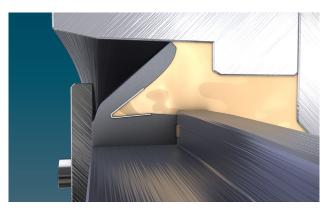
Sealing arrangement in a roller bearing for a direct drive turbine - sealing towards the outside diameter
